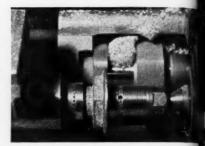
Two threads of different diameters milled simultaneously in this thread mill machine.
